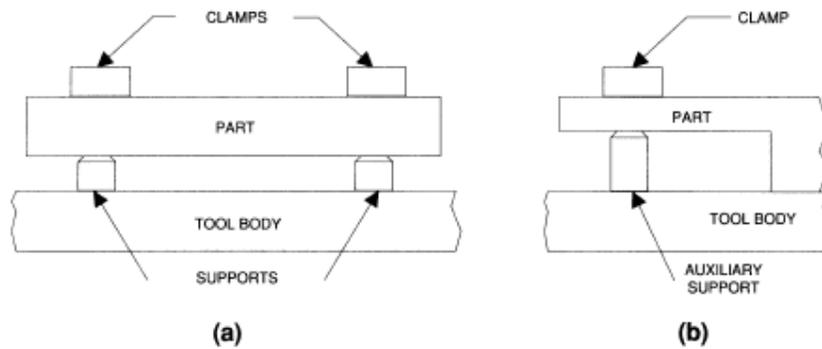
The number and position of clamps is determined by the workpiece and its supports.
